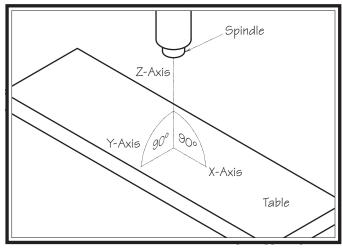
Spindle axis perpendicular to the table X-and Y-axes.
